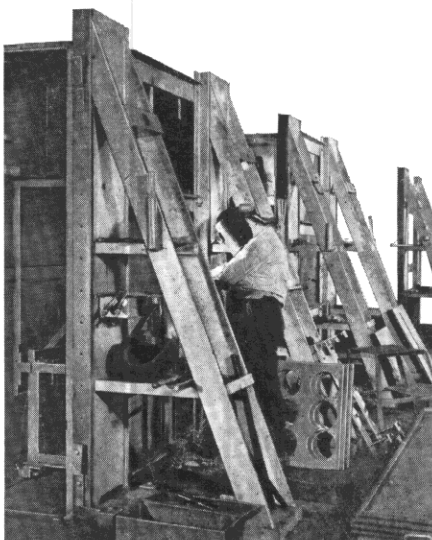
Rigid upright welding fixtures assure uniform, plumb and square stationary structures.
